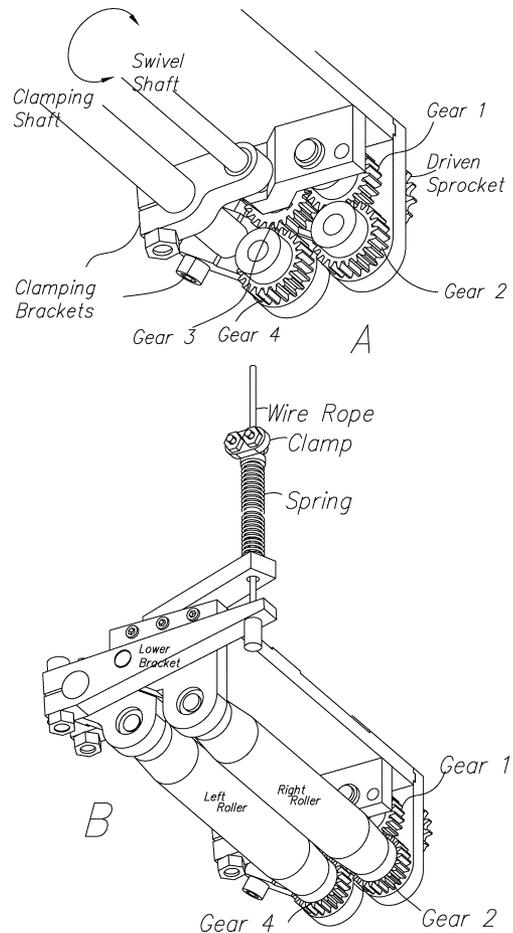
(a) Beneath the end-effector with the rollers removed. (b) Spring that pushes the left roller against the right roller.
